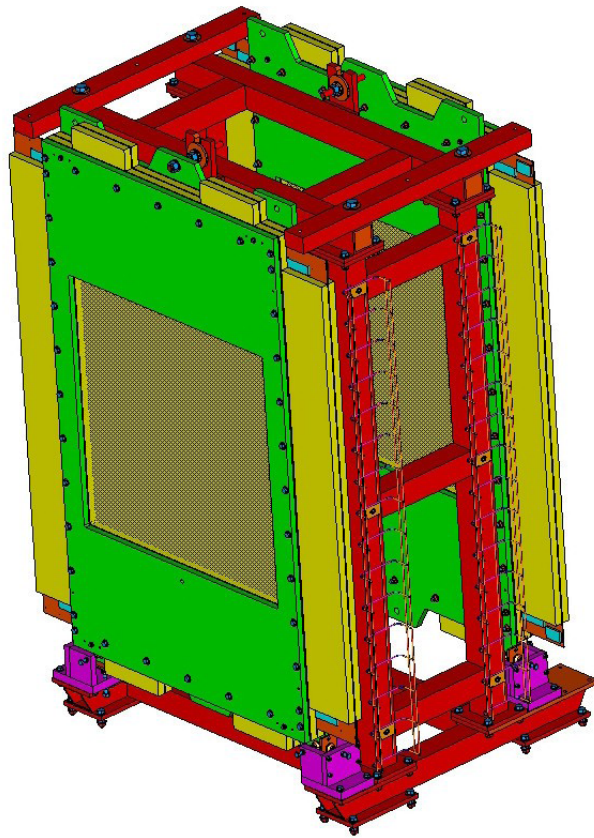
Technical drawing of SHMS drift chambers mounted in detector hut frame.
